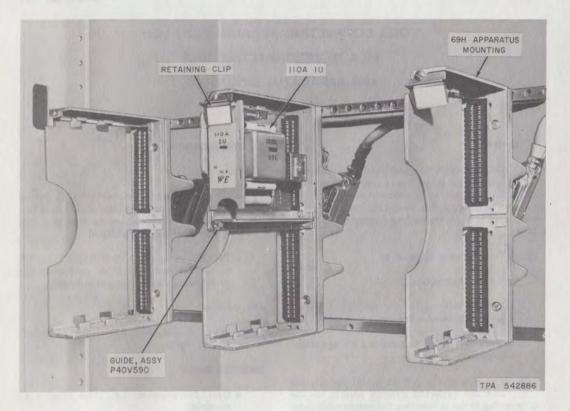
H Apparatus Mounting Mounted on Relay Rack
